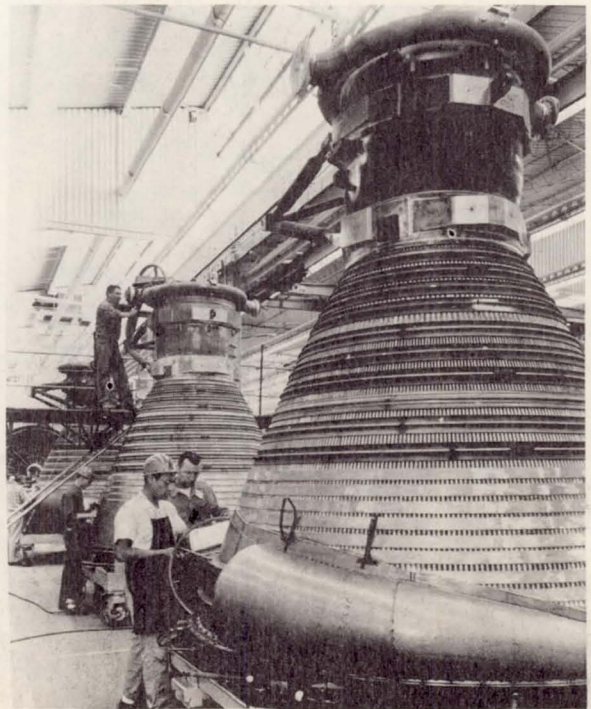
F-1 thrust chamber. (Courtesy Rocketdyne.)
